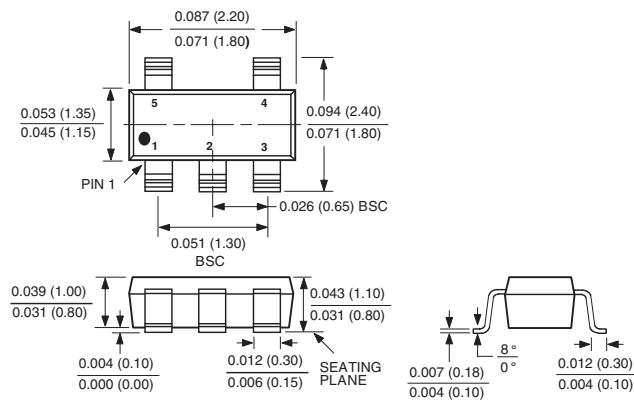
5-Lead Plastic Surface Mount Package [SC-70]
